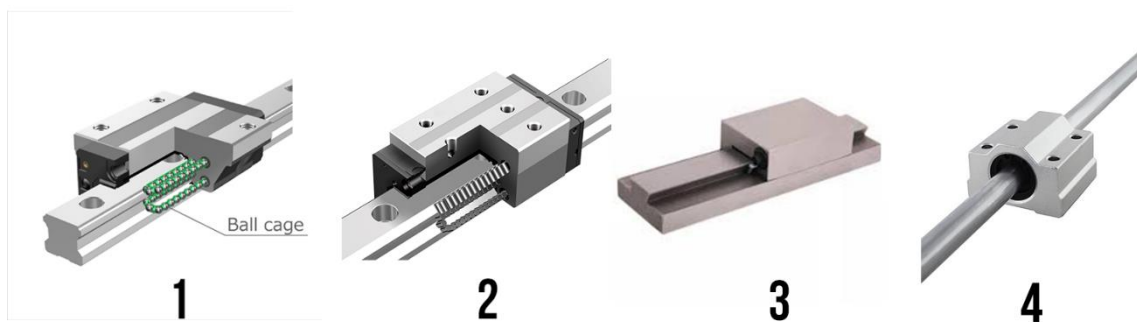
Examples of the most used linear motion components: 1 - ball bearing linear rail + carriage, 2 - roller bearing linear rail + carriage, 3 - dovetail slides, 4 - linear shaft
